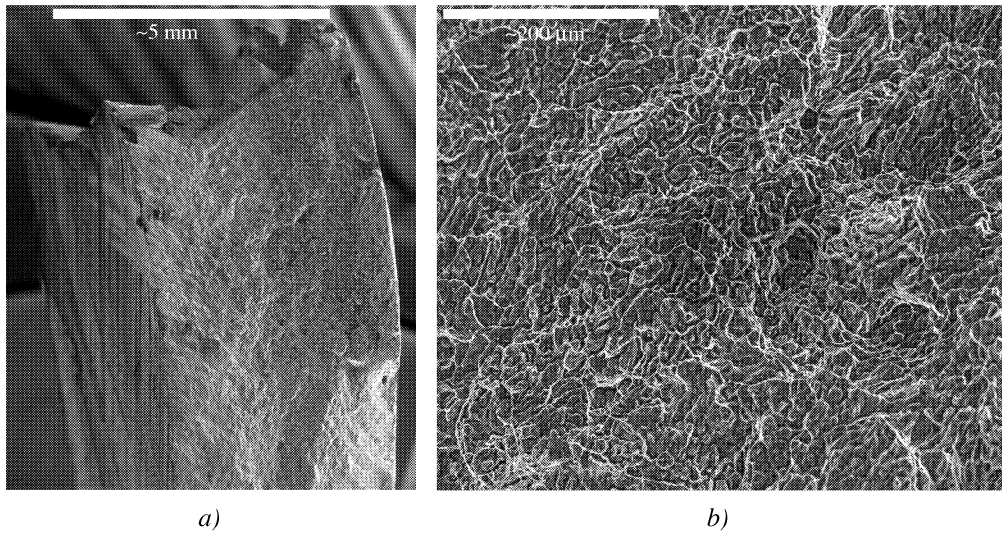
a) Fracture surface in the weld (at Point P1 in Figure 103), and b) magnification of the fracture surface showing an intergranular fracture.
